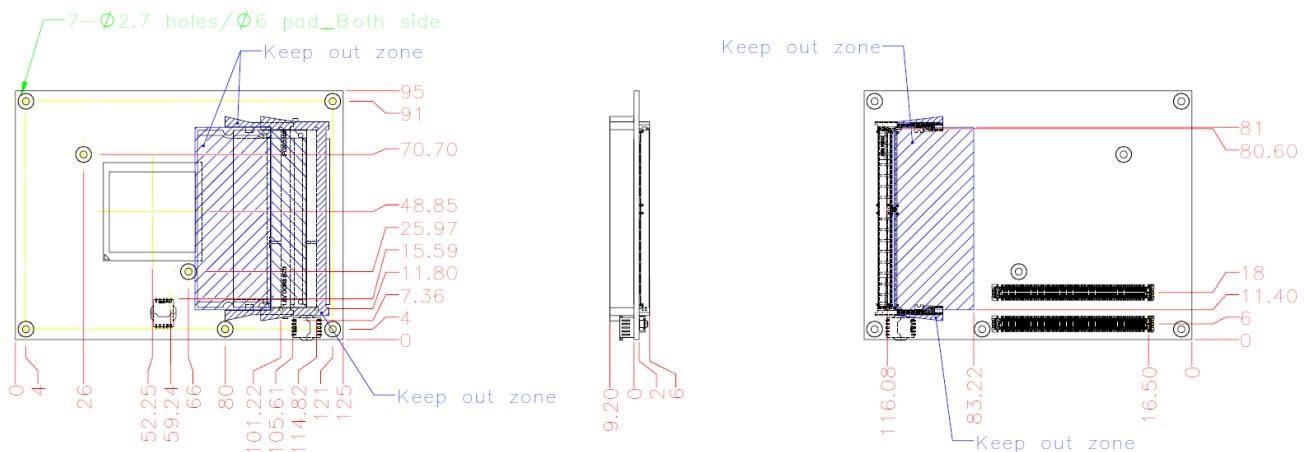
PCOM-B700G-NS Dimension – TOP & Bottom
